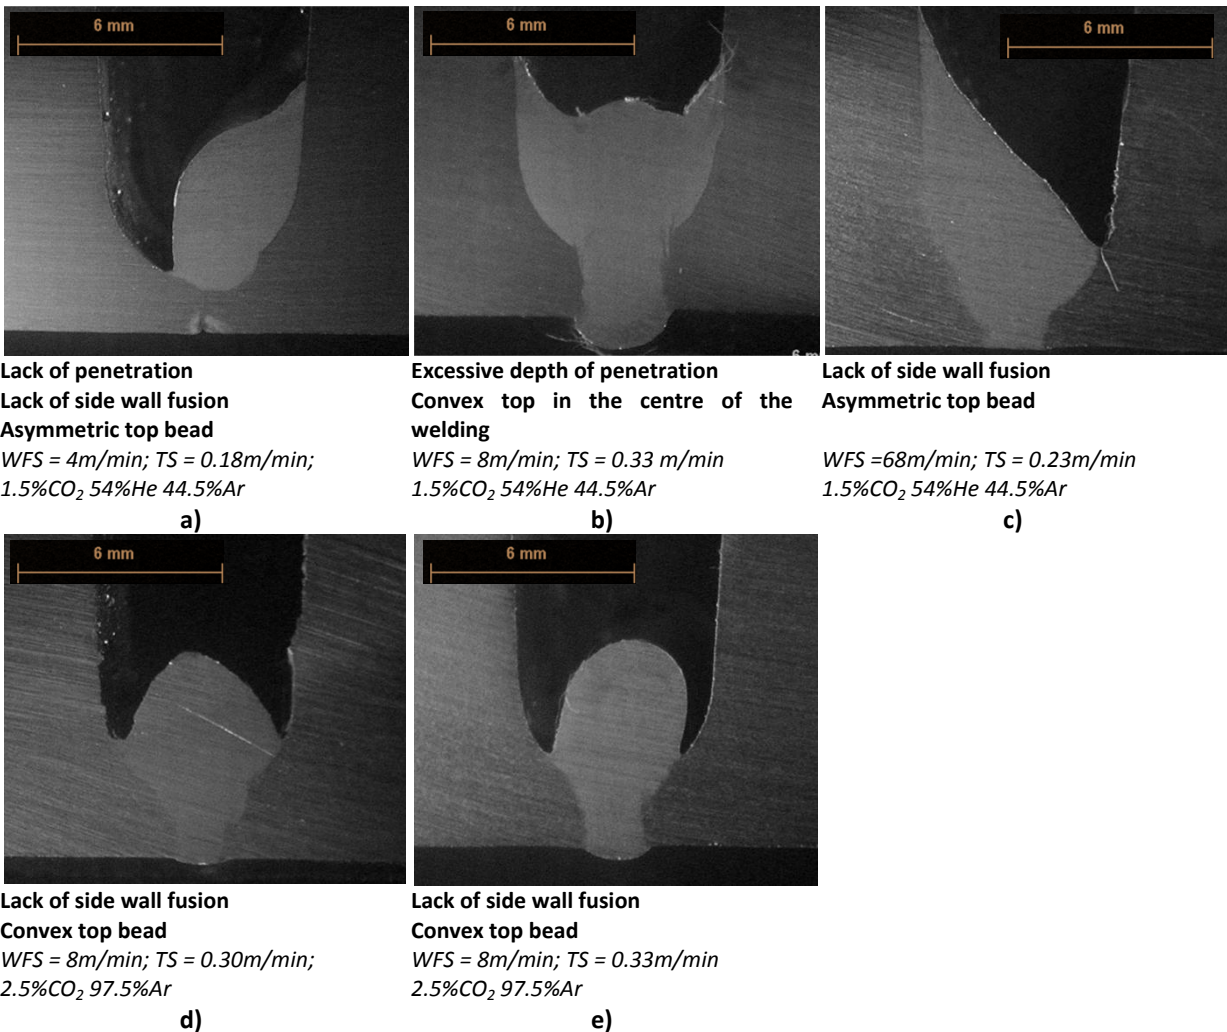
Macrostructures illustrating defects on welding of narrow groove pipe using CMT.
